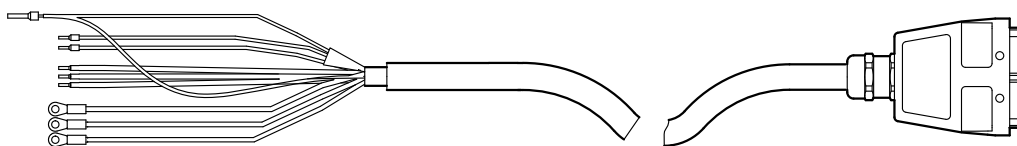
Brakemotor cable with motor protection; conductor end sleeves/ring-type cable lugs, HAN 10E
